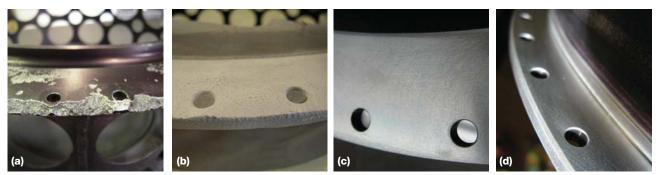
Repair of an aluminum component in a utility engine for a private jet; (a) before with extensive corrosion damage; (b) as sprayed with aluminum; (c) as machined; (d) finished part.
